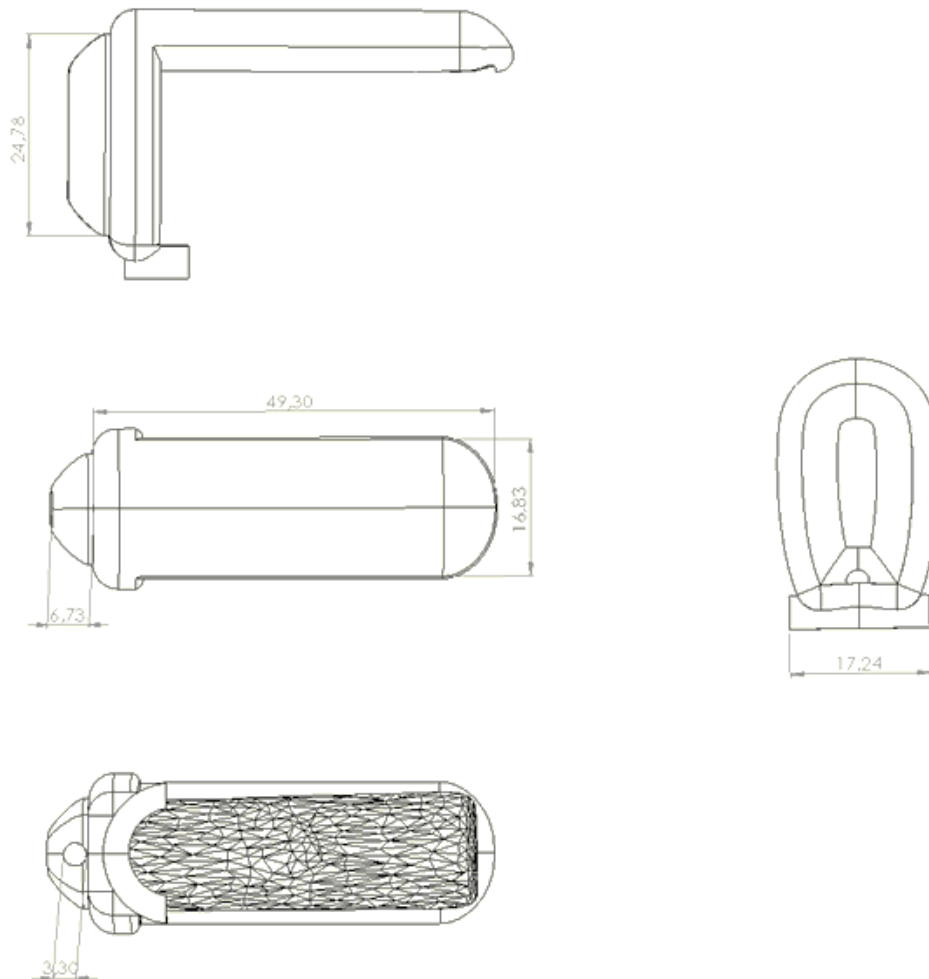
Technical drawings of adapter, dimensions in millimeters.
